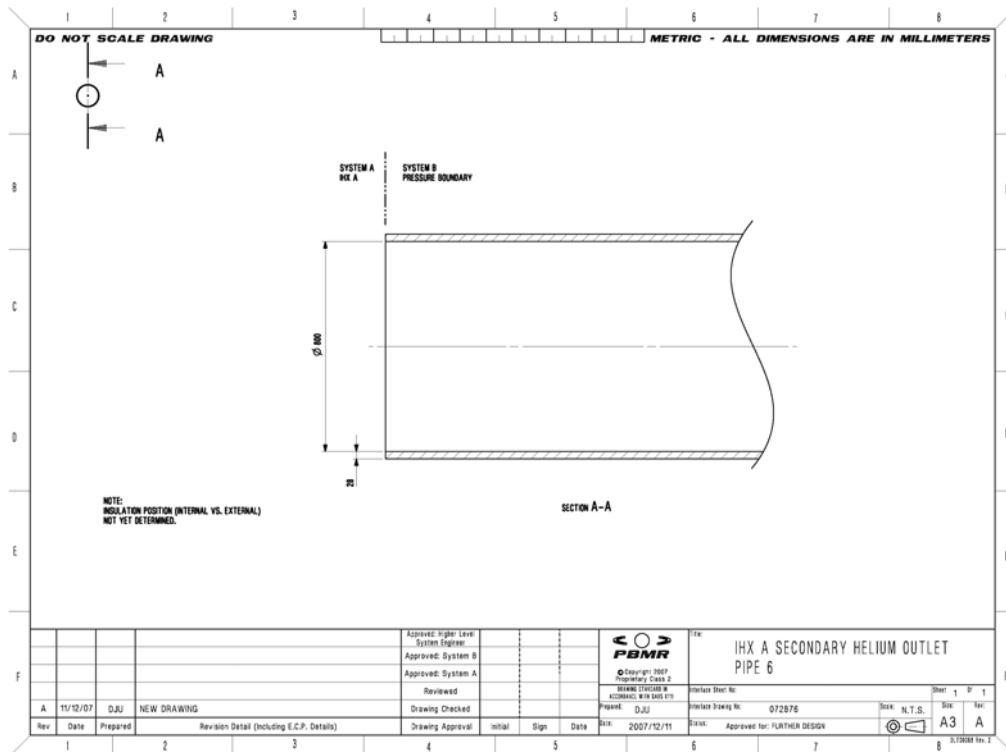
IHX/Piping Interface Drawing Pipe 6
